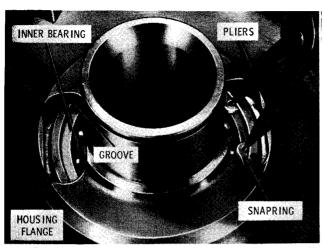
Removing (or installing) inner bearing snapring (VH, VSI series)
